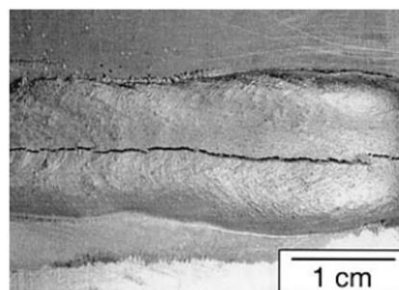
Solidification cracking in gas metal arc weld of 6061 Al-alloy, adapted from [81]
